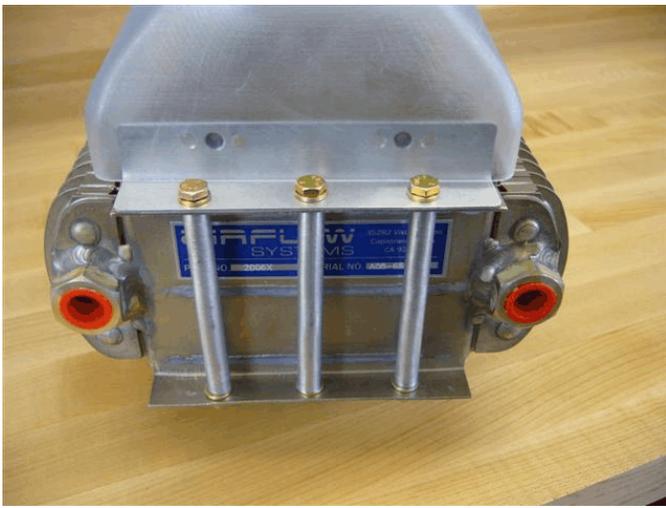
With duct in position, mark position of first two mounting holes. Temporarily install two of the supplied AN-3 bolts and drill two opposite mounting holes.
